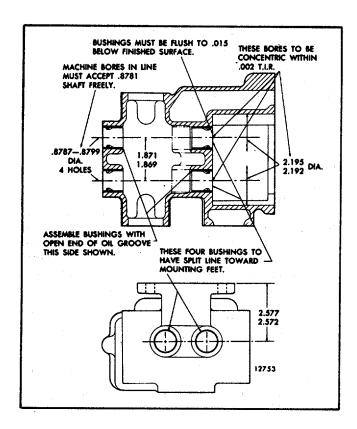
Diameter and Location of Bushing in Oil Pump (12V Engine)
